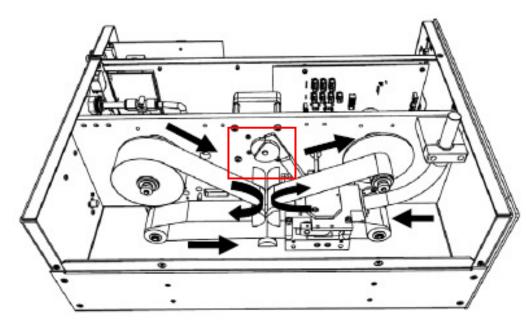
Filter Tape Assembly. The Cam is located in the center of the filter tape assembly.
